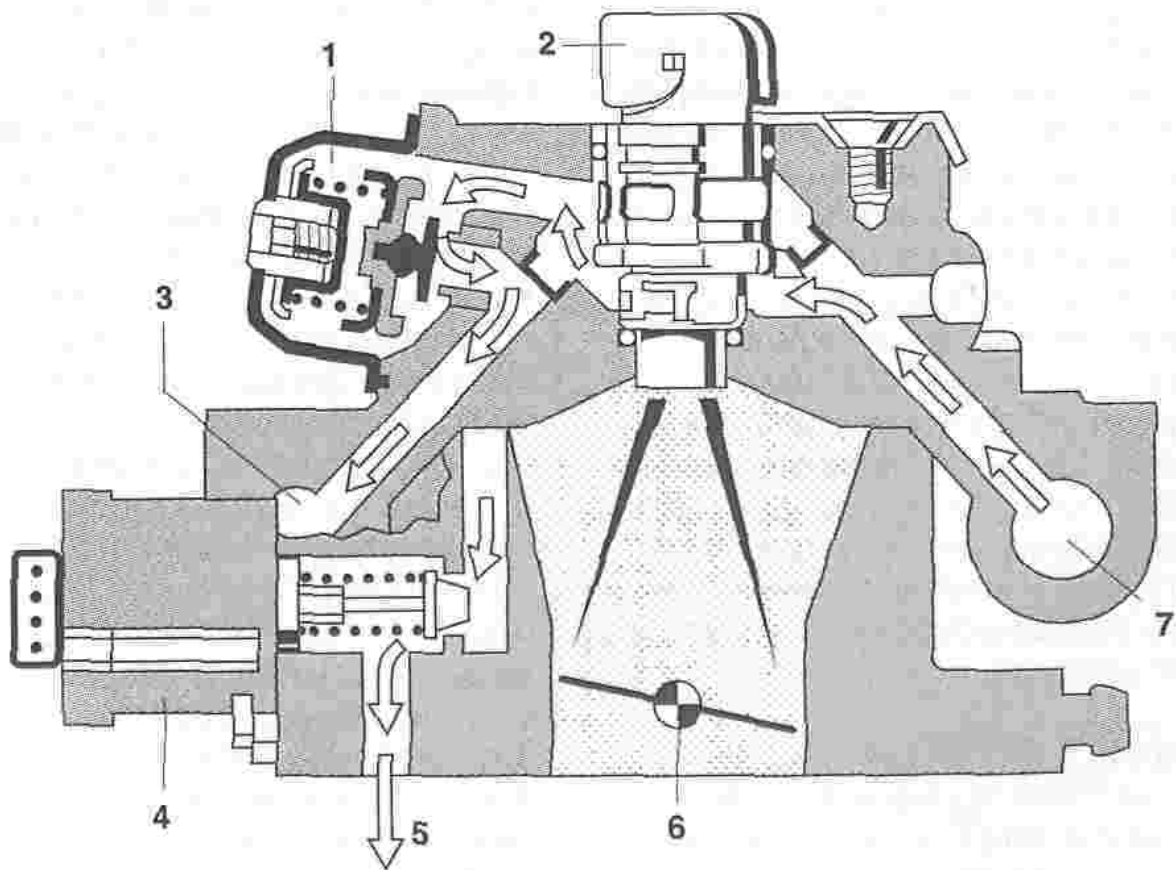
Central injection unit (Opel): 1 – pressure regulator; 2 – injector; 3 – fuel return; 4 – stepper motor to control the engine idling; 5 – to the engine intake manifold; 6 – throttle valve; 7 – fuel intake
